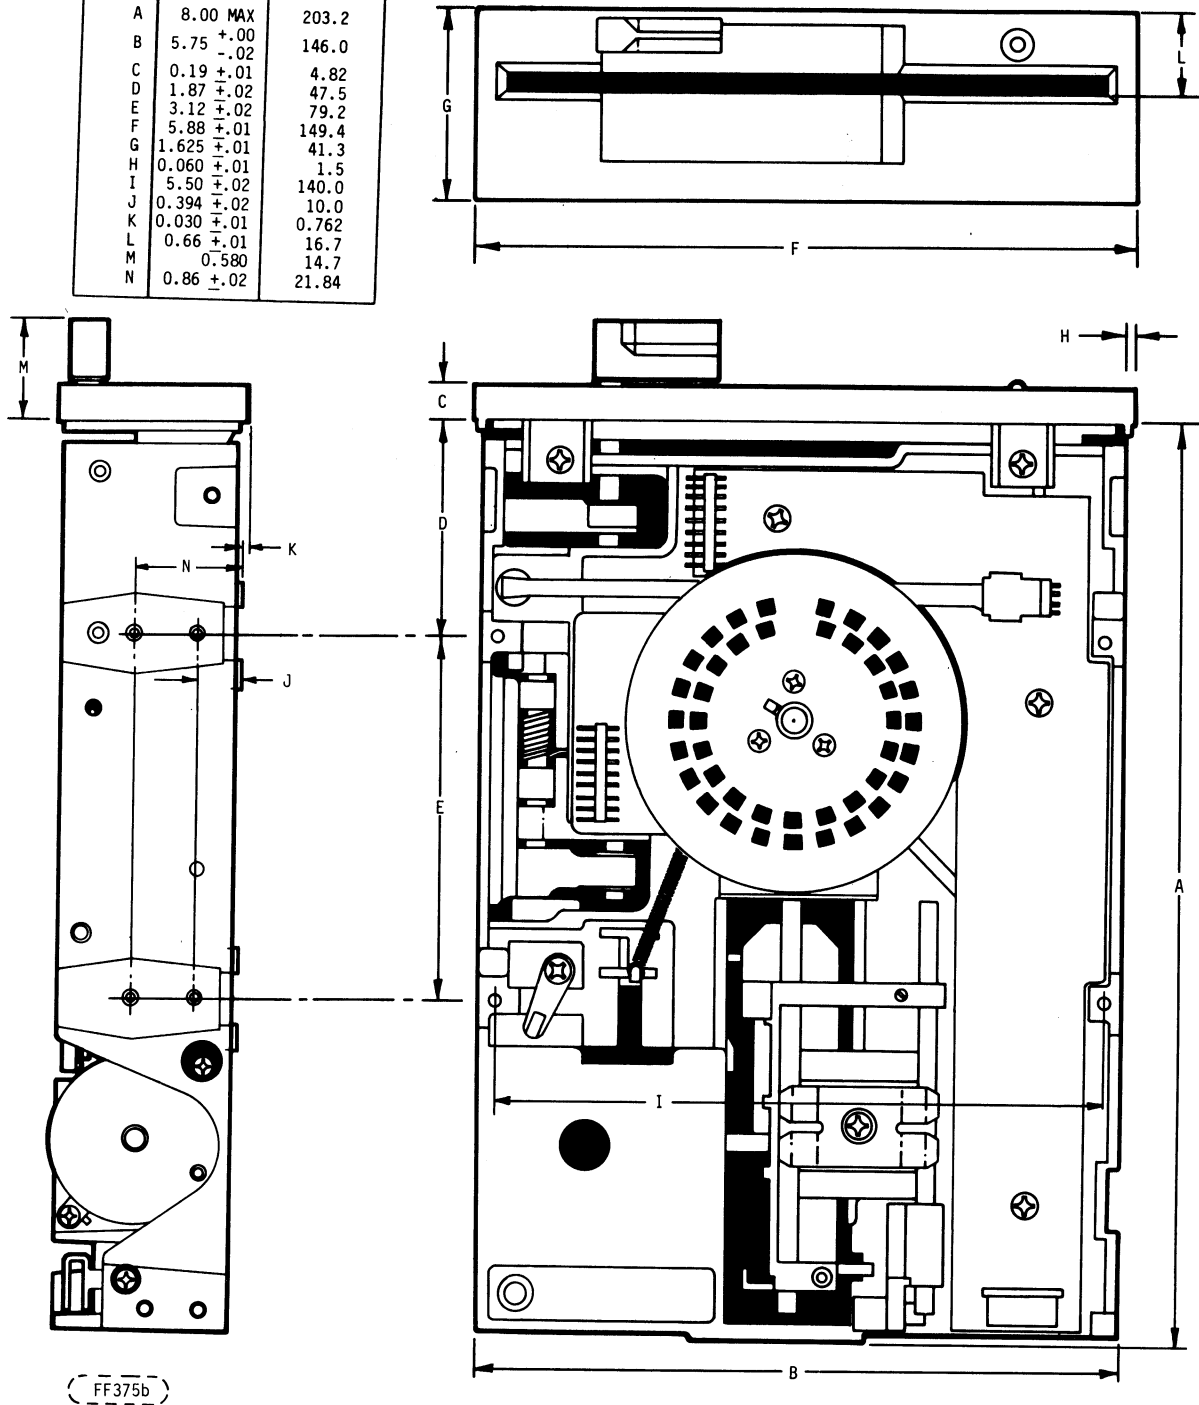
OVERALL AND MOUNTING DIMENSIONS OF 9428 FDD
